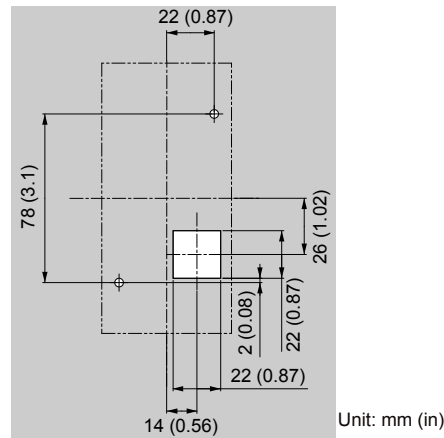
Panel Cut-Out Dimensions (External/Face-Mount Installation)
